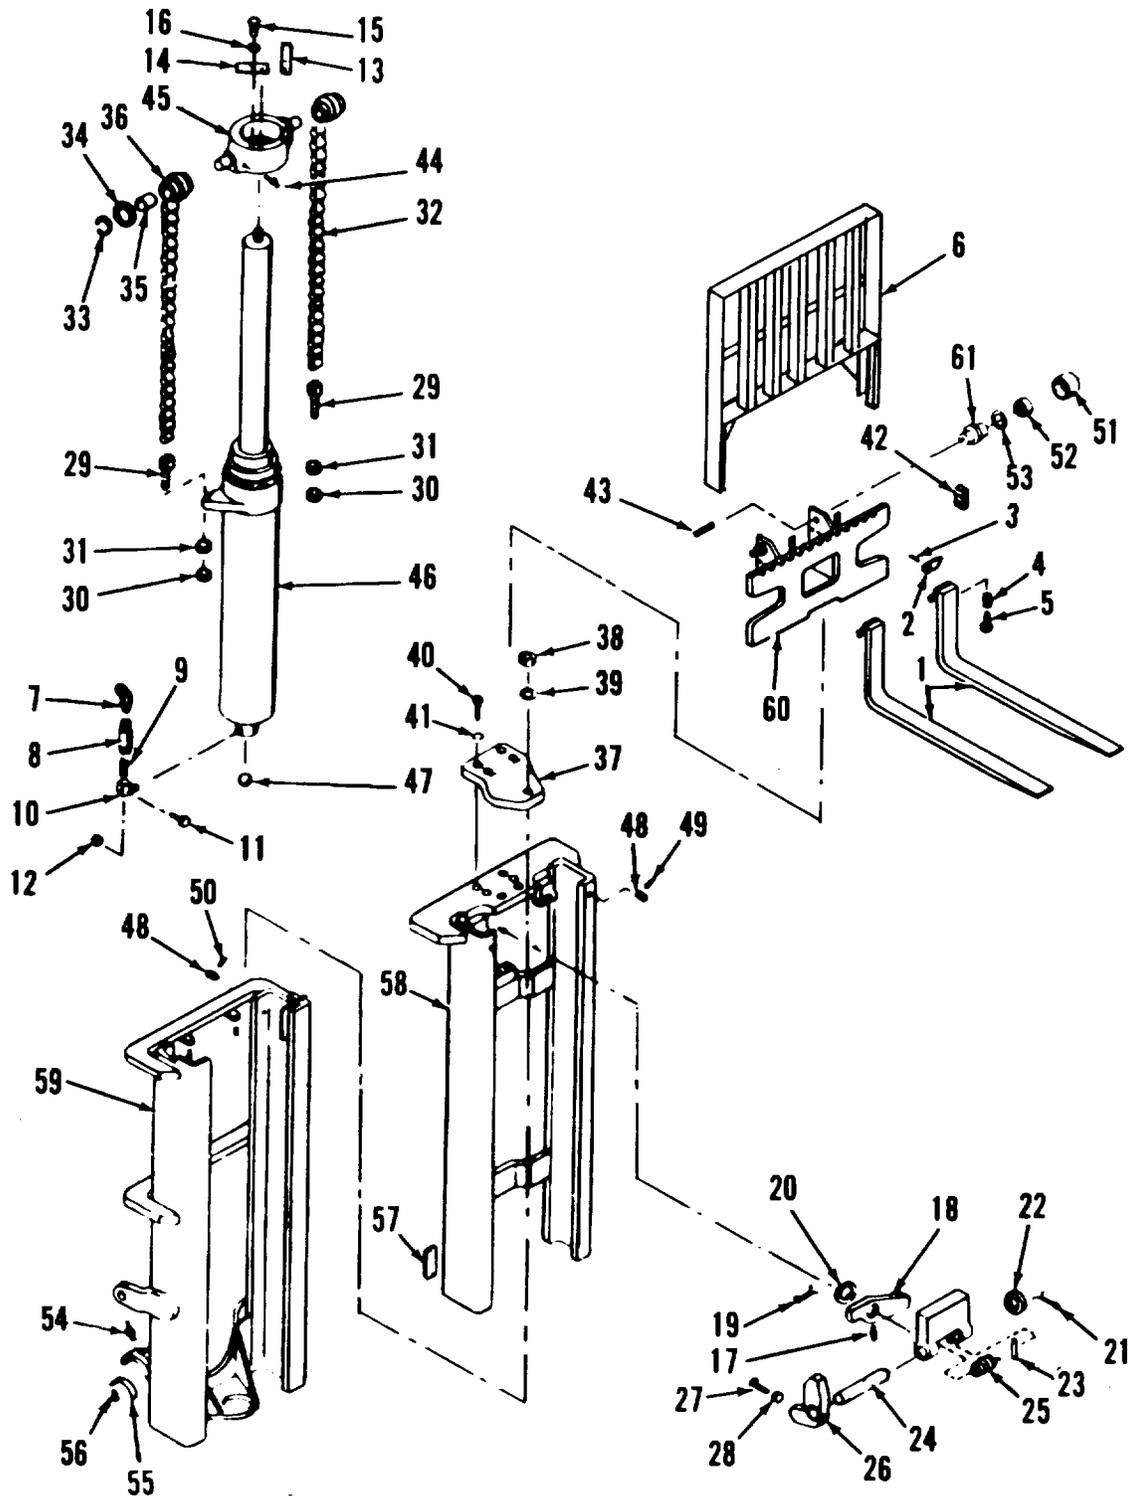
Uprights, Backrest, Fork and Carriage Assembly
